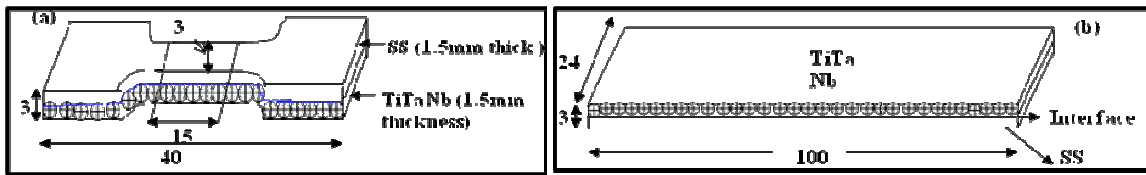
Schematic of specimens used for (a) tensile and (b) bend tests in longitudinal direction (dimensions in mm)
